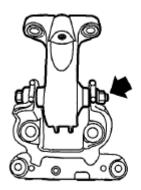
Locating Front Cushion Rubber Bolt Courtesy of SUBARU OF AMERICA, INC.
